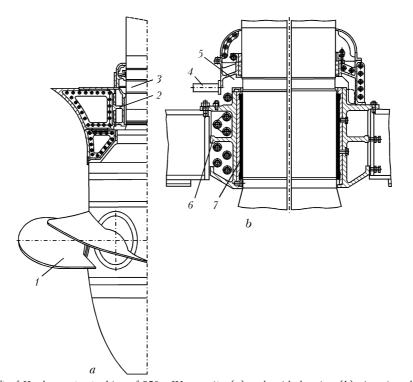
Scheme of shaft of Kaplan water turbine of 250 mW capacity (a) and guide bearing (b): 1 — impeller; 2 — guide bearing; 3 — turbine shaft; 4 — pipeline for bringing water; 5 — receiving vessel for water; 6 — guide bearing housing; 7 — rubber-coated collar step
